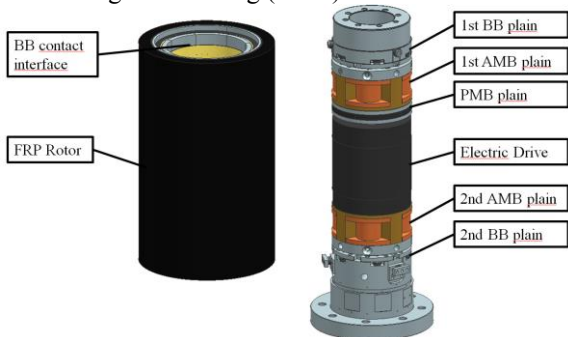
Rotor and stator model of the Outer-Rotor-Type IMS-Flywheel
